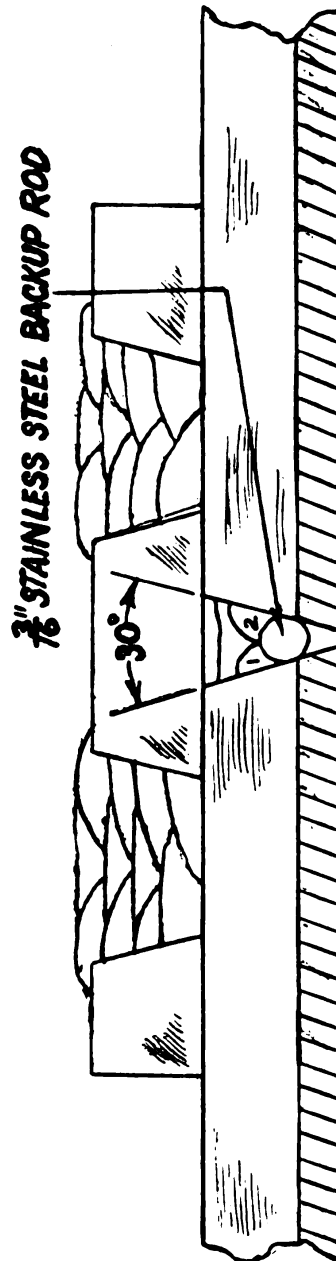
Plug Welded Butt Strap (Poor Fit-Up).
